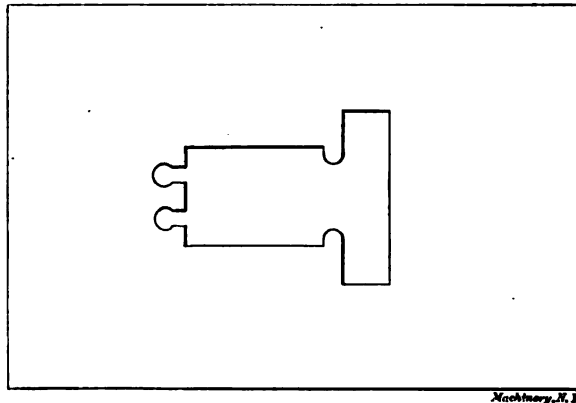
Method of Making Dies to Prevent Breakage in Hardening.
